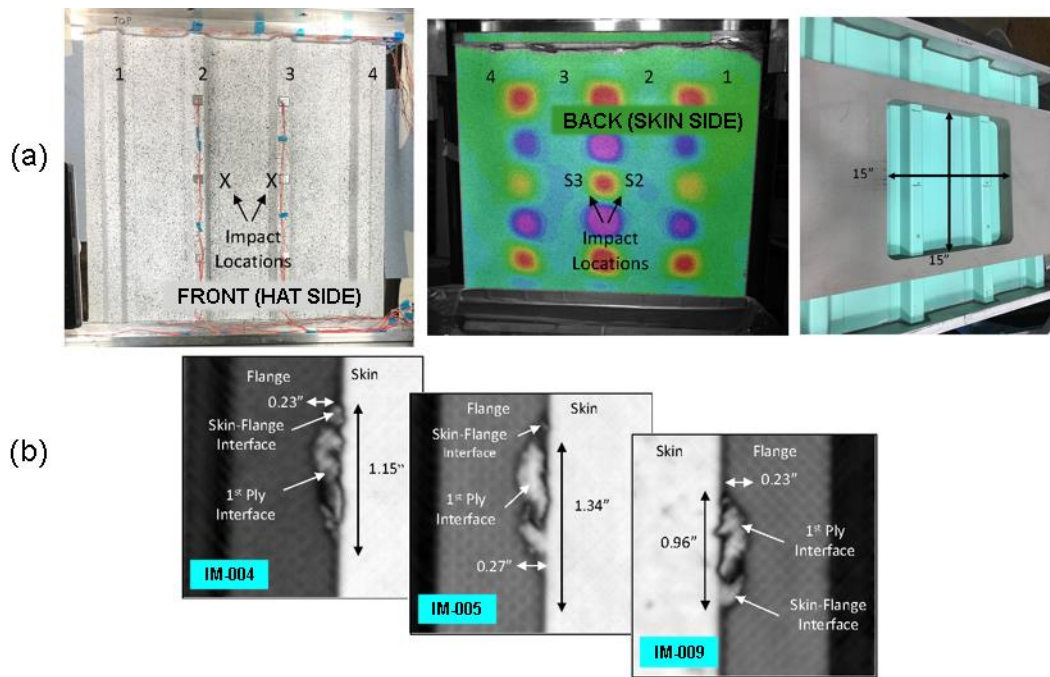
(a) L to R: Impact Locations Shown from Front, Impact Locations Shown from Back, Impact Event Fixture with Specimen, (b) UT Inspection Scans of Initial Impact Damage on Static Panels
